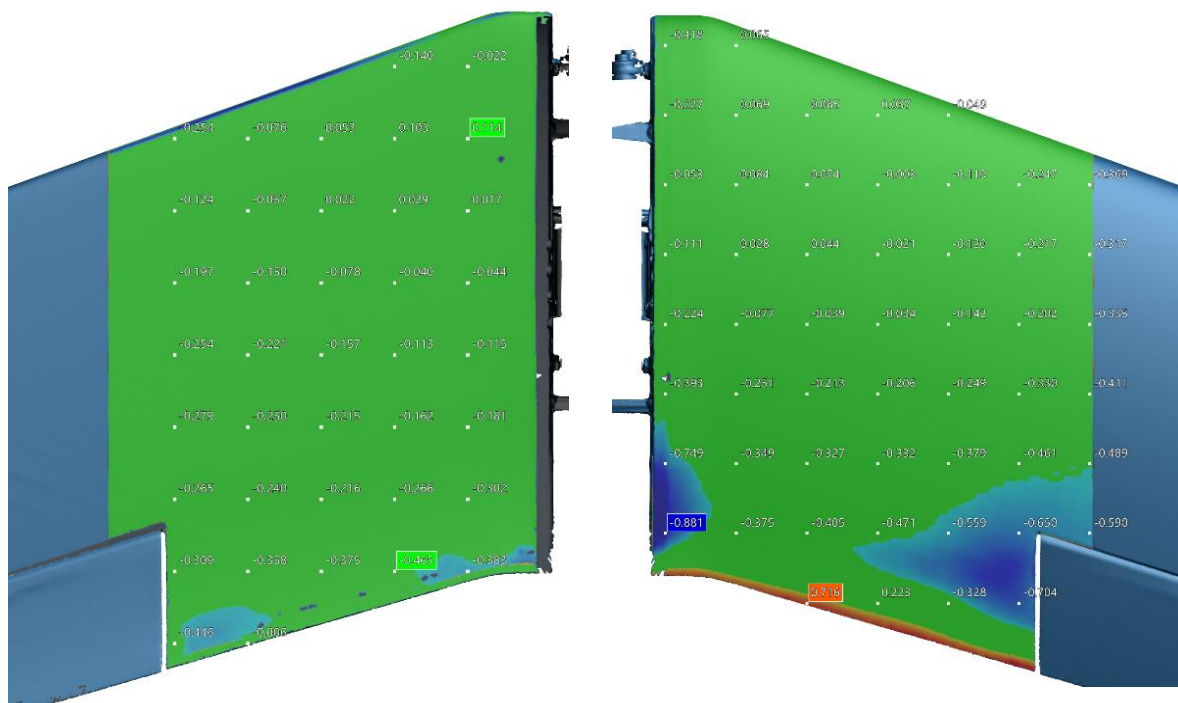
Comparison in between the scanned wing and the CAD model (bottom surface left and top surface right). The built wing mostly matches the CAD within 0.5mm.
